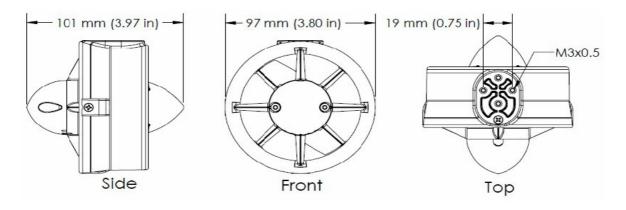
Dimension of T100 thruster (source: Blue Robotics Inc.)
